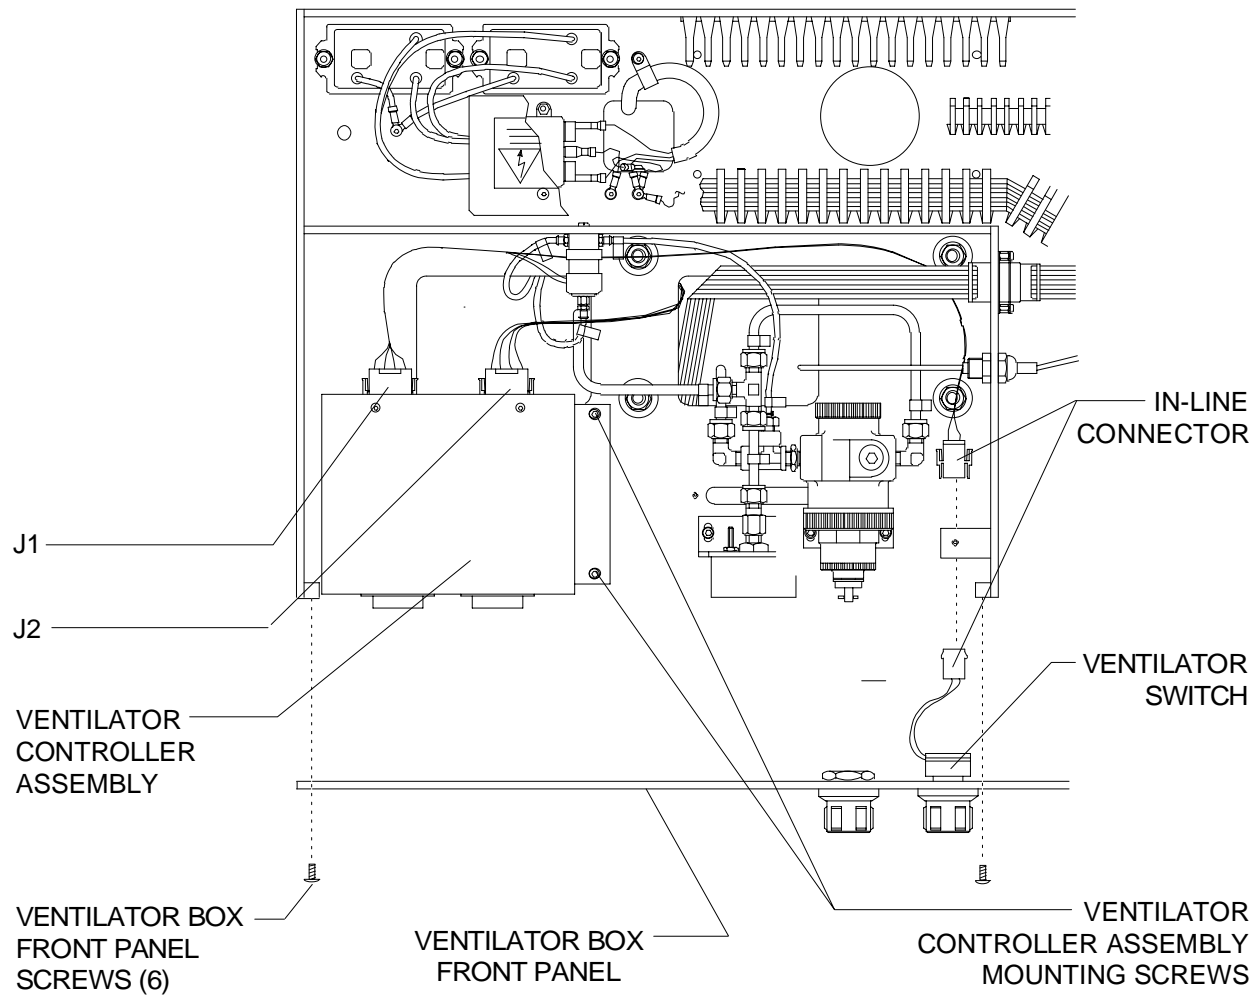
VENTILATOR CONTROLLER ASSEMBLY
